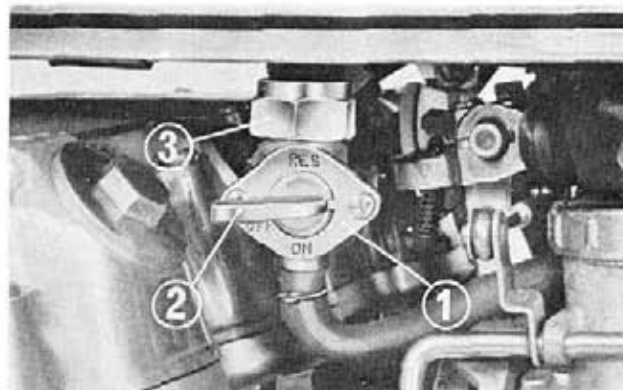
① Fuel cock ② Lever ③ Fuel cock fixing nut
